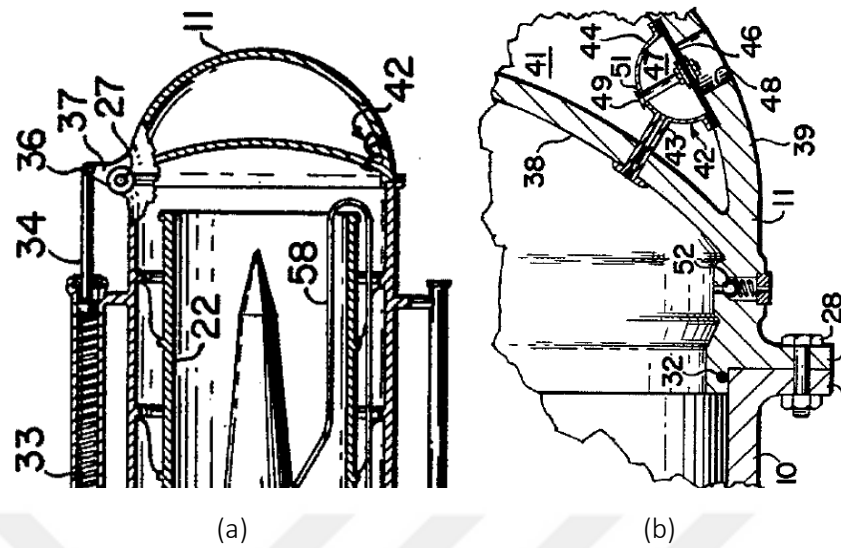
Side View (Left) and Detailed View (Right) of a Pyrotechnic Type Cover Example [27]
